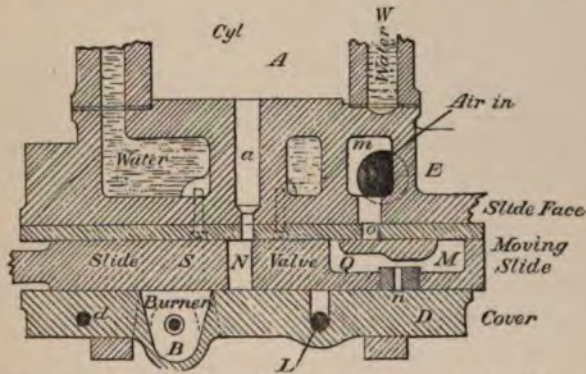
Otto Engine, 1876—Sectional Plan of Slide Valve.
